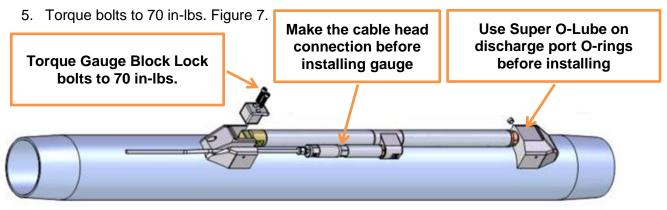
Installing the AMERADA C-5000/5500 in the gauge carrier.
